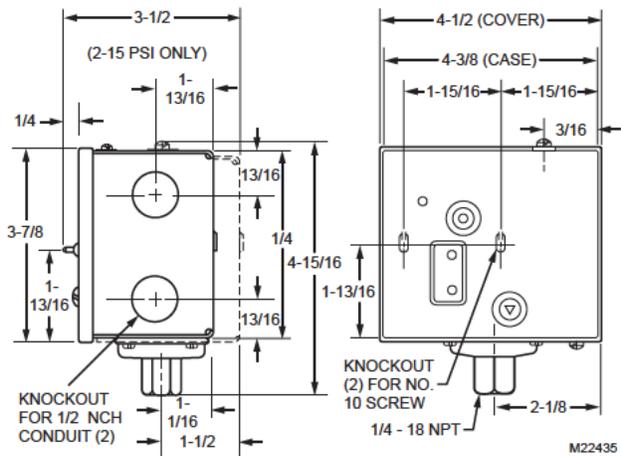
L4079A,B,W PressureTrol® Limit Control dimensions in in.
